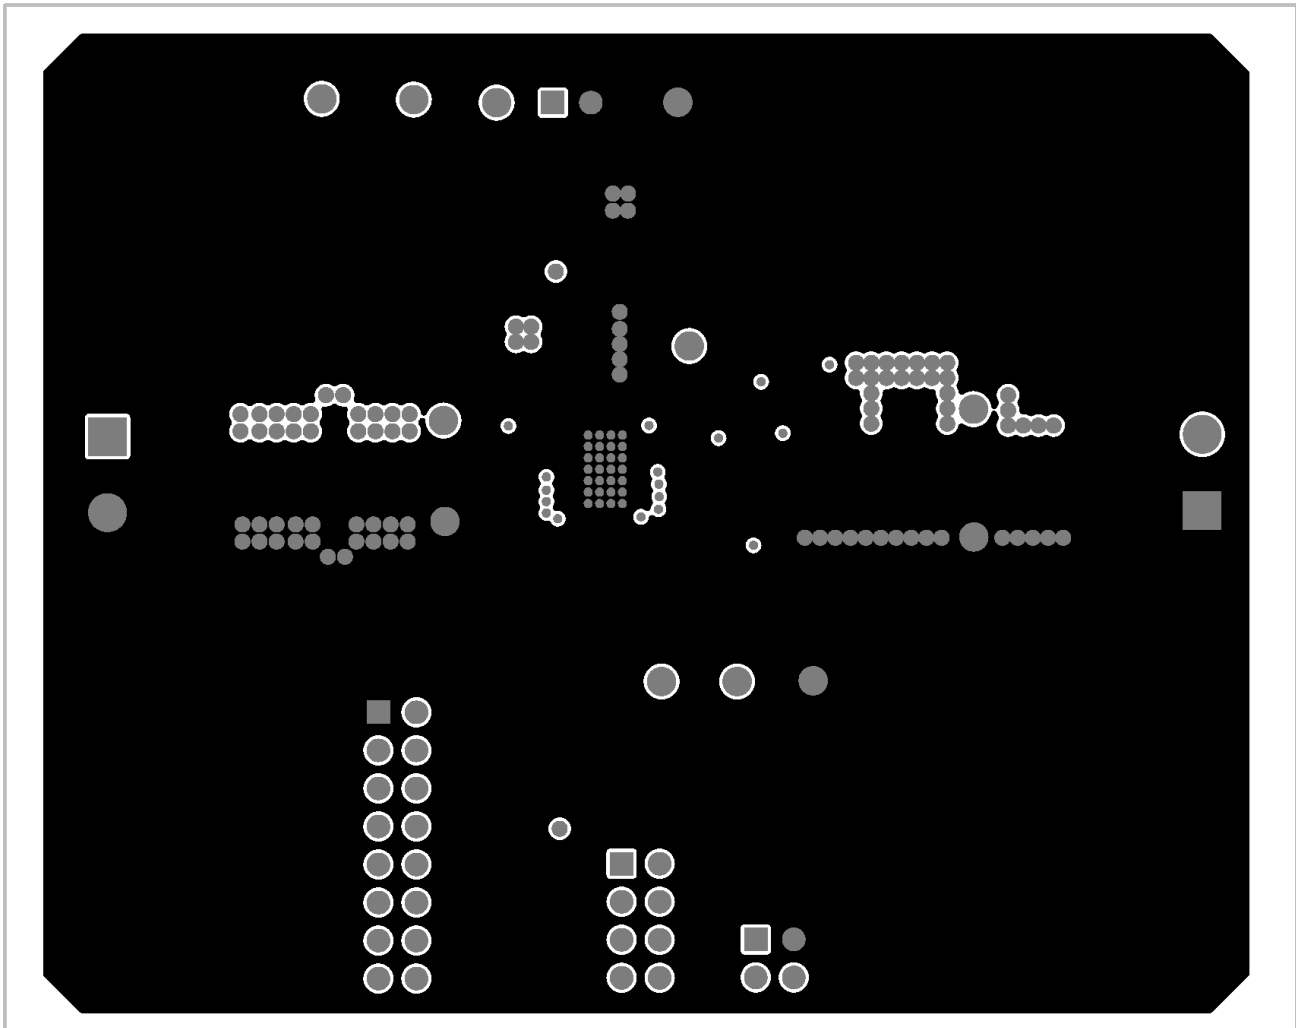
TPS53319EVM-136 Bottom Assembly Drawing
